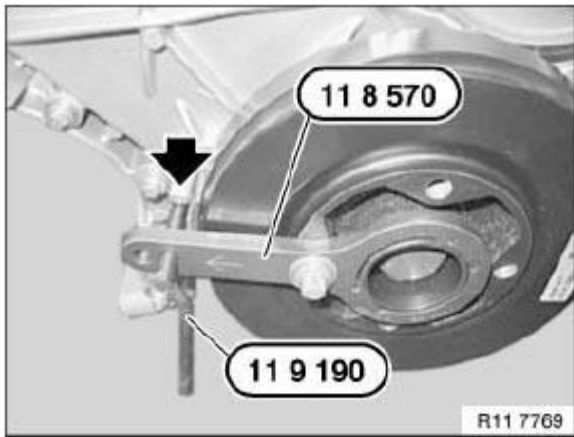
Identifying Special Tools Position (11 8 570 And 11 9 190)
